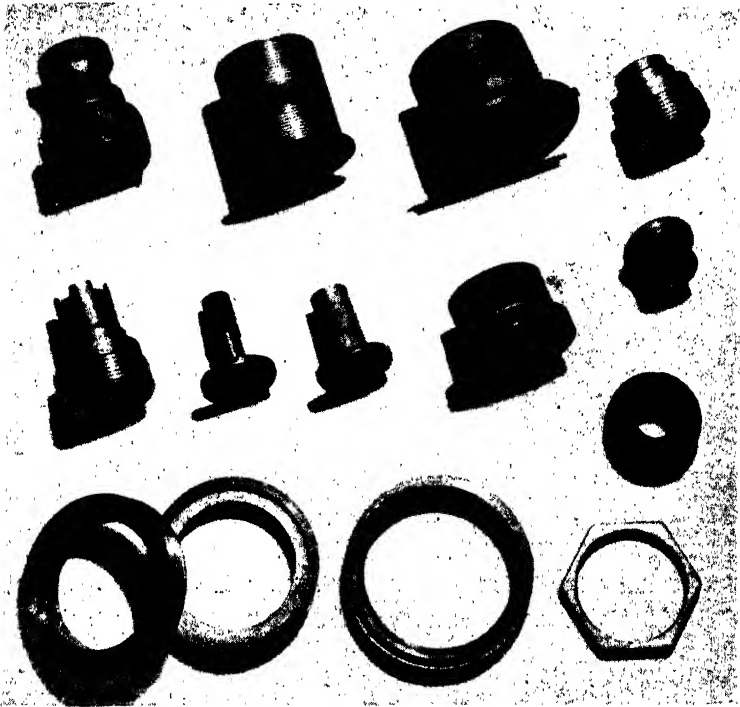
These parts, die cast in alloys based on zinc, aluminum, and copper, respectively, could be duplicated in shape, though probably not with equal economy, on the screw machine, but certain minor secondary operations on other machines would be necessary.
